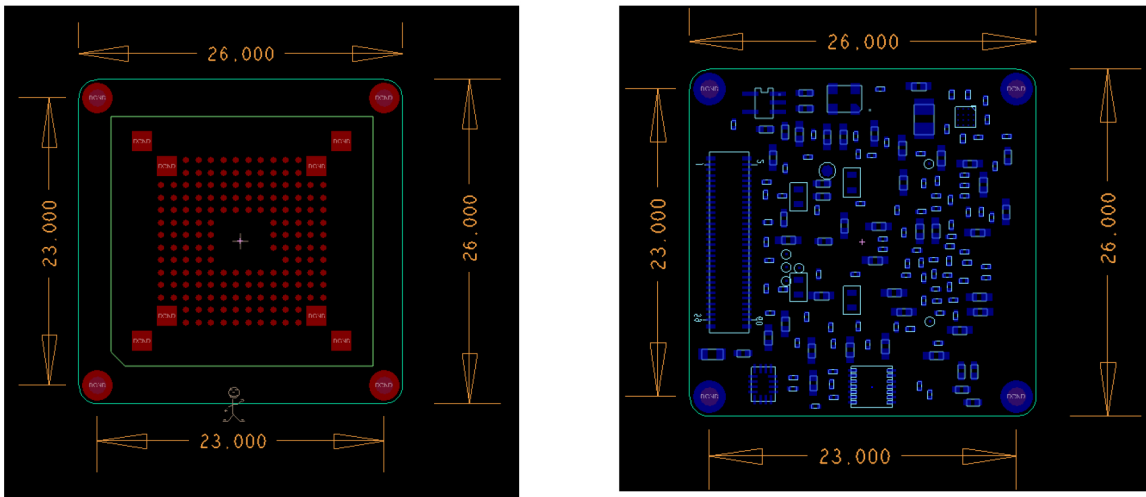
Imager Board (26 mm × 26 mm Form Factor)
